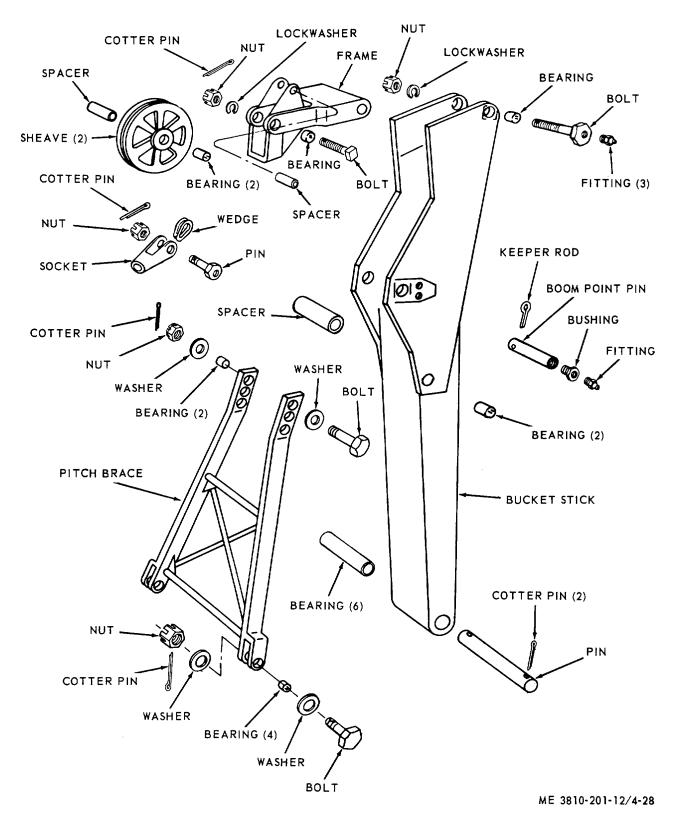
Backhoe bucket stick, disassembly and reassembly.
